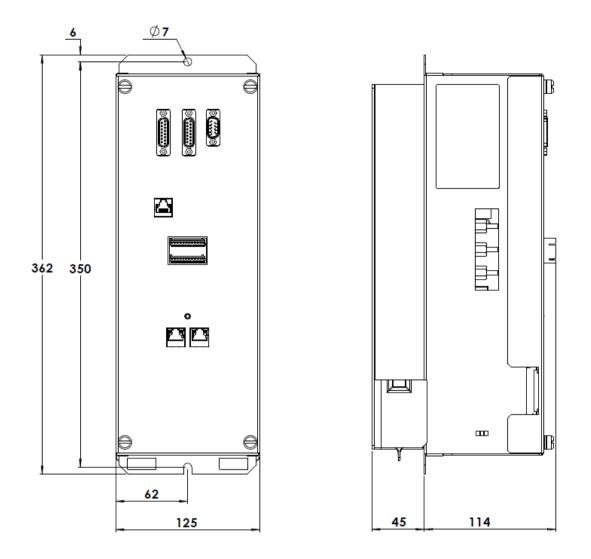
35A and 35AH Drive dimensions (with IO Interface) Recessed mount
